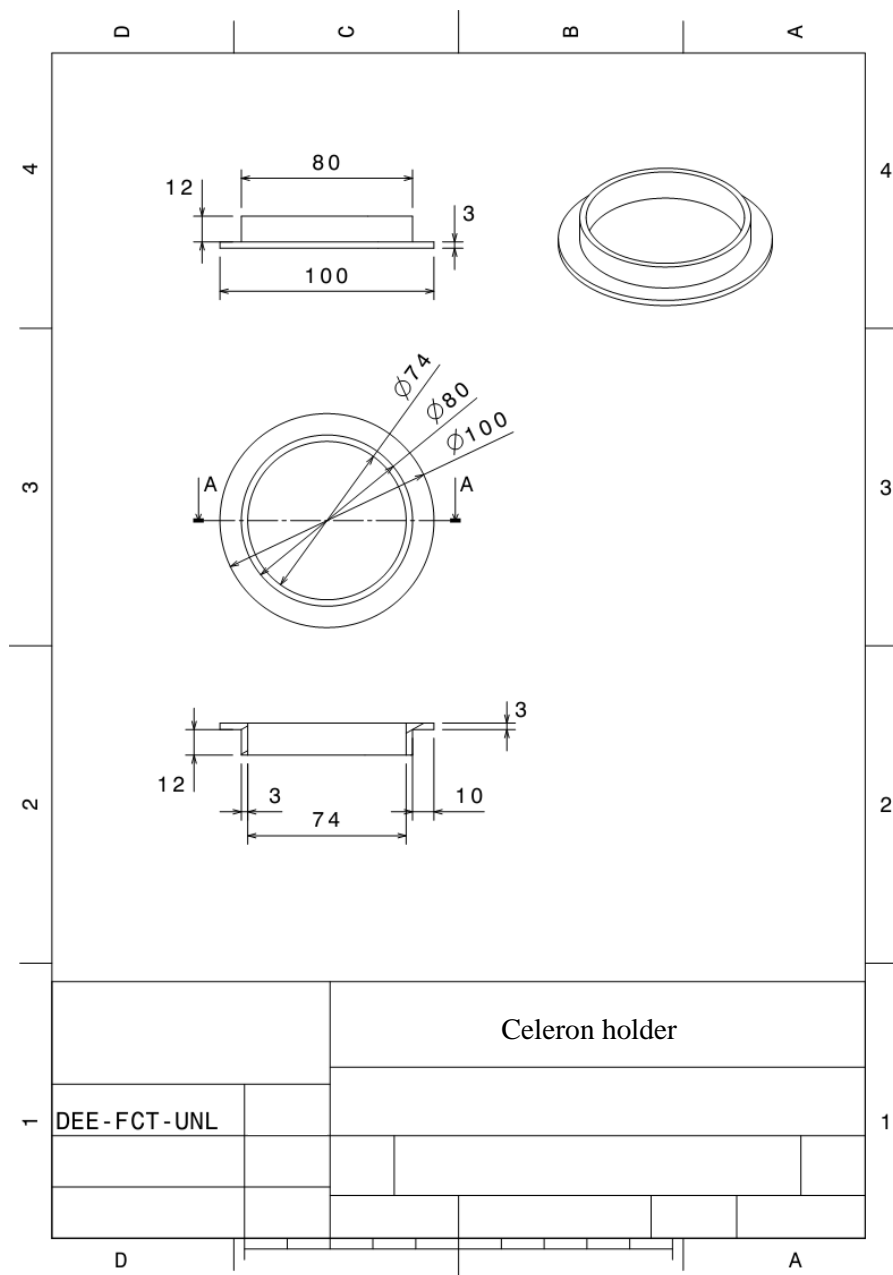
Dimensions, in mm, of the Celeron holder.
